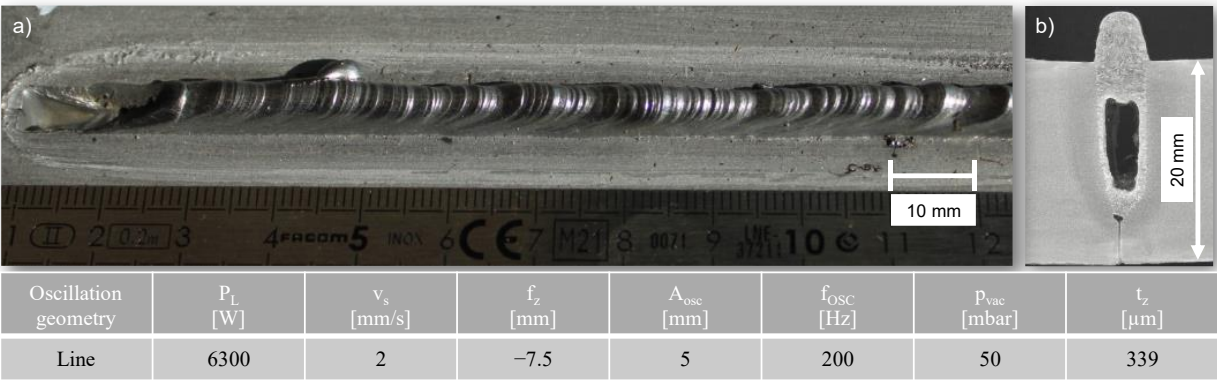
Welding parameters and (a) weld seam with linear oscillation; (b) macro-section of the weld seam with milled edge preparation.
